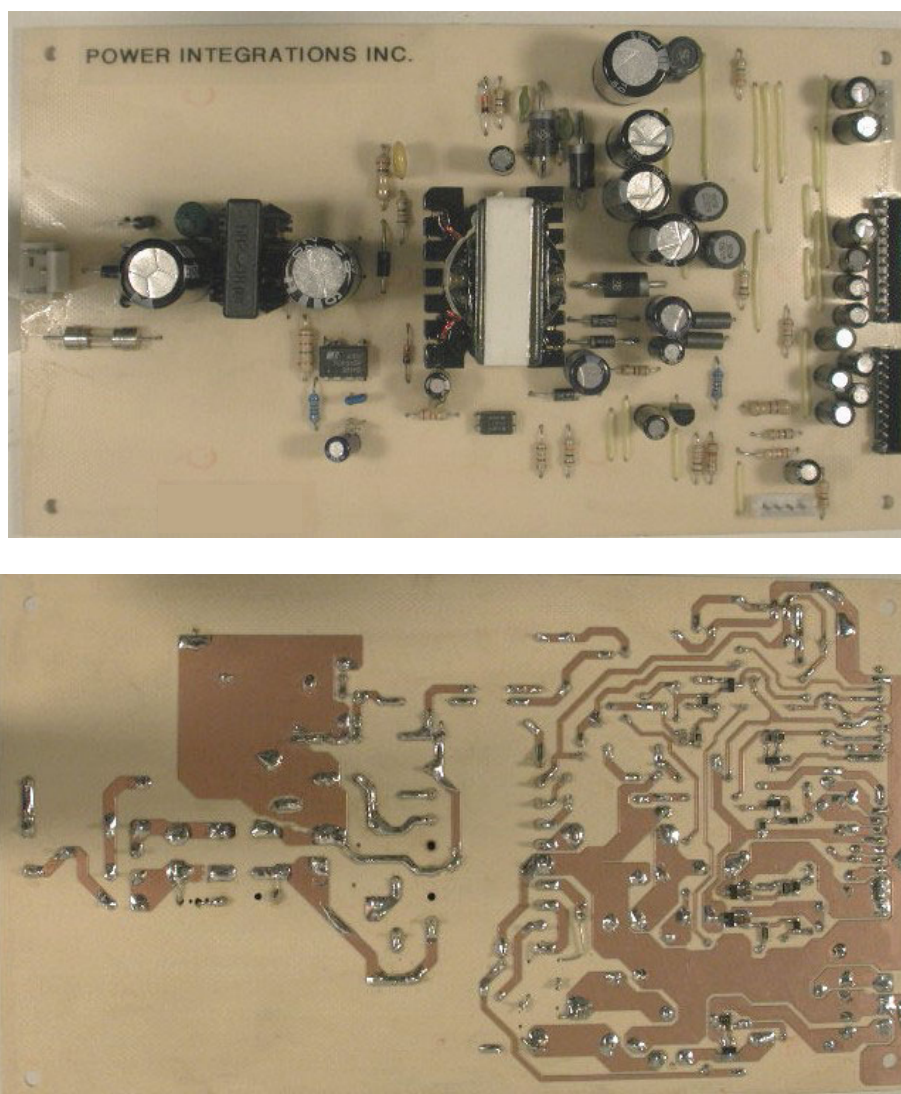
Populated Circuit Board Photograph. Component side (Top) and Solder side (Bottom).
